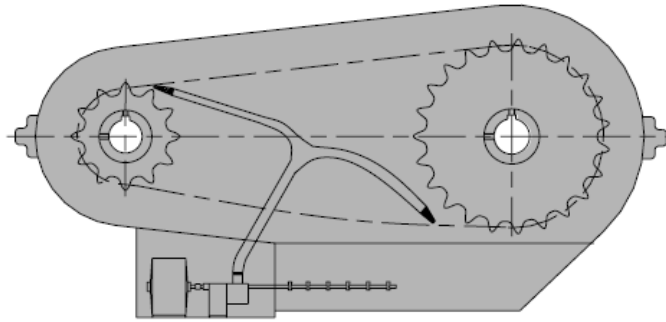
Chain drive rig direct lubrication with oil jet [34]
